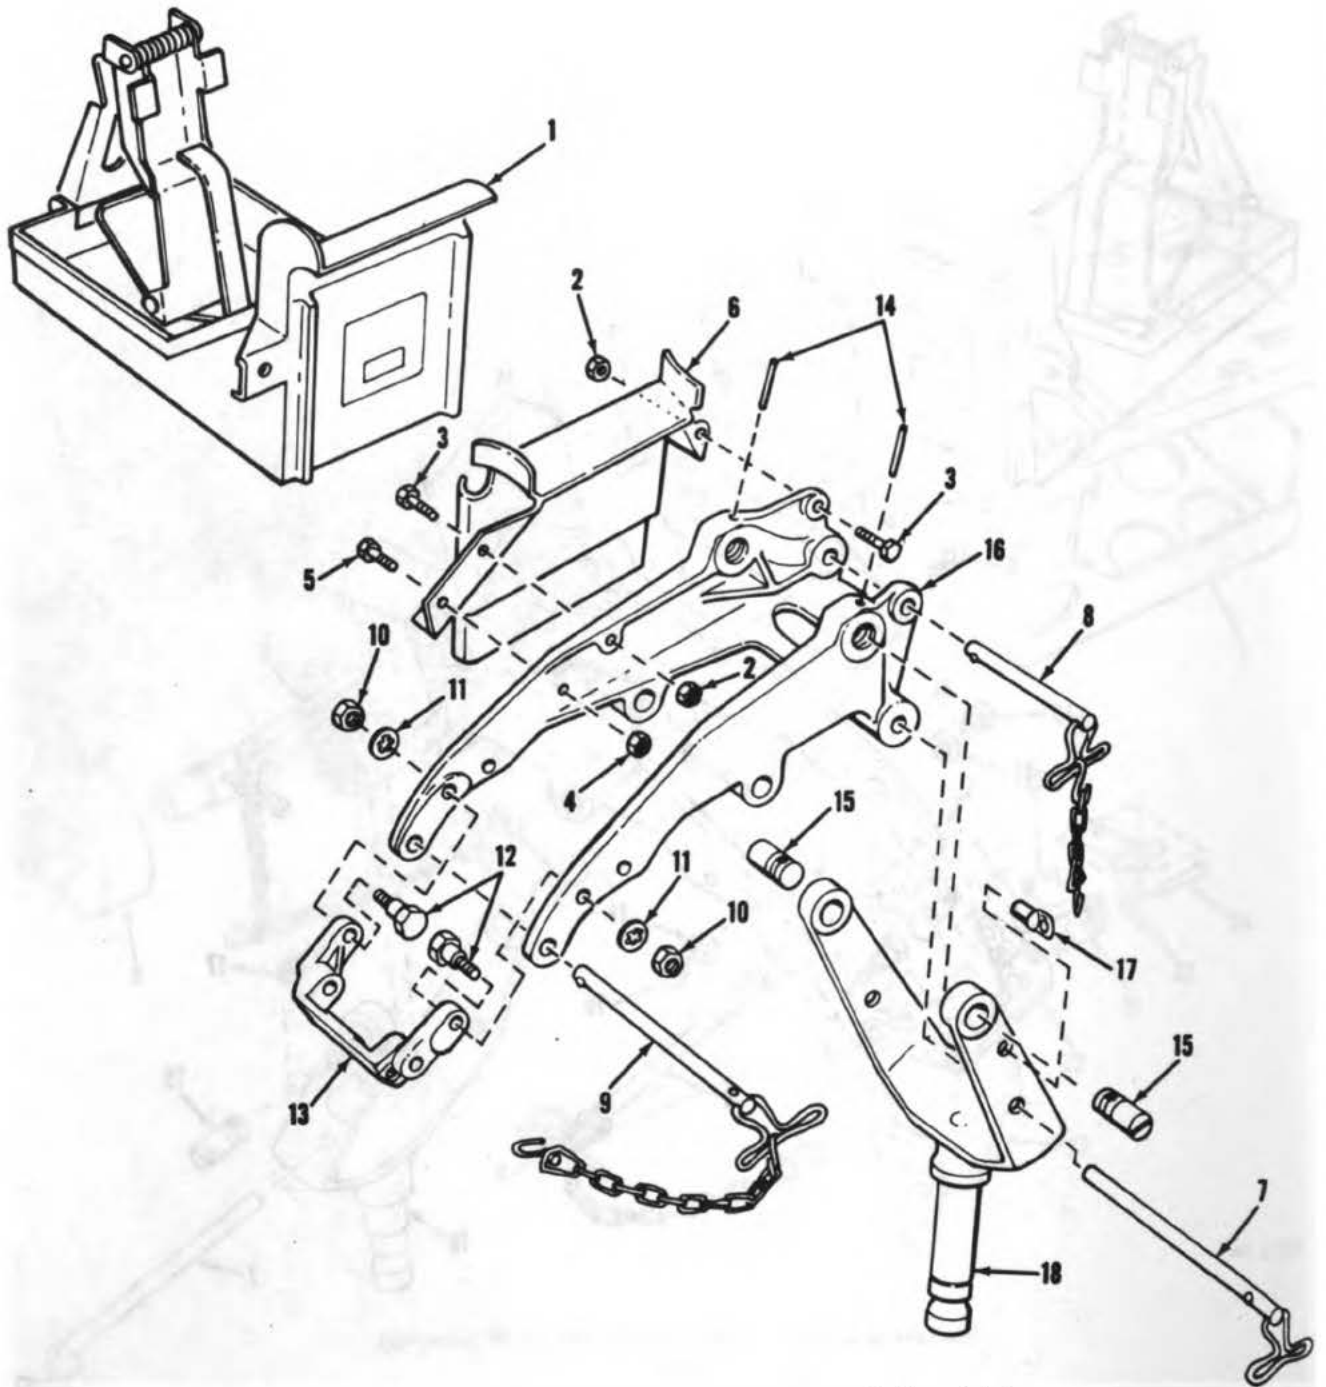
Mount, machine gun—6540733—partially exploded view.
